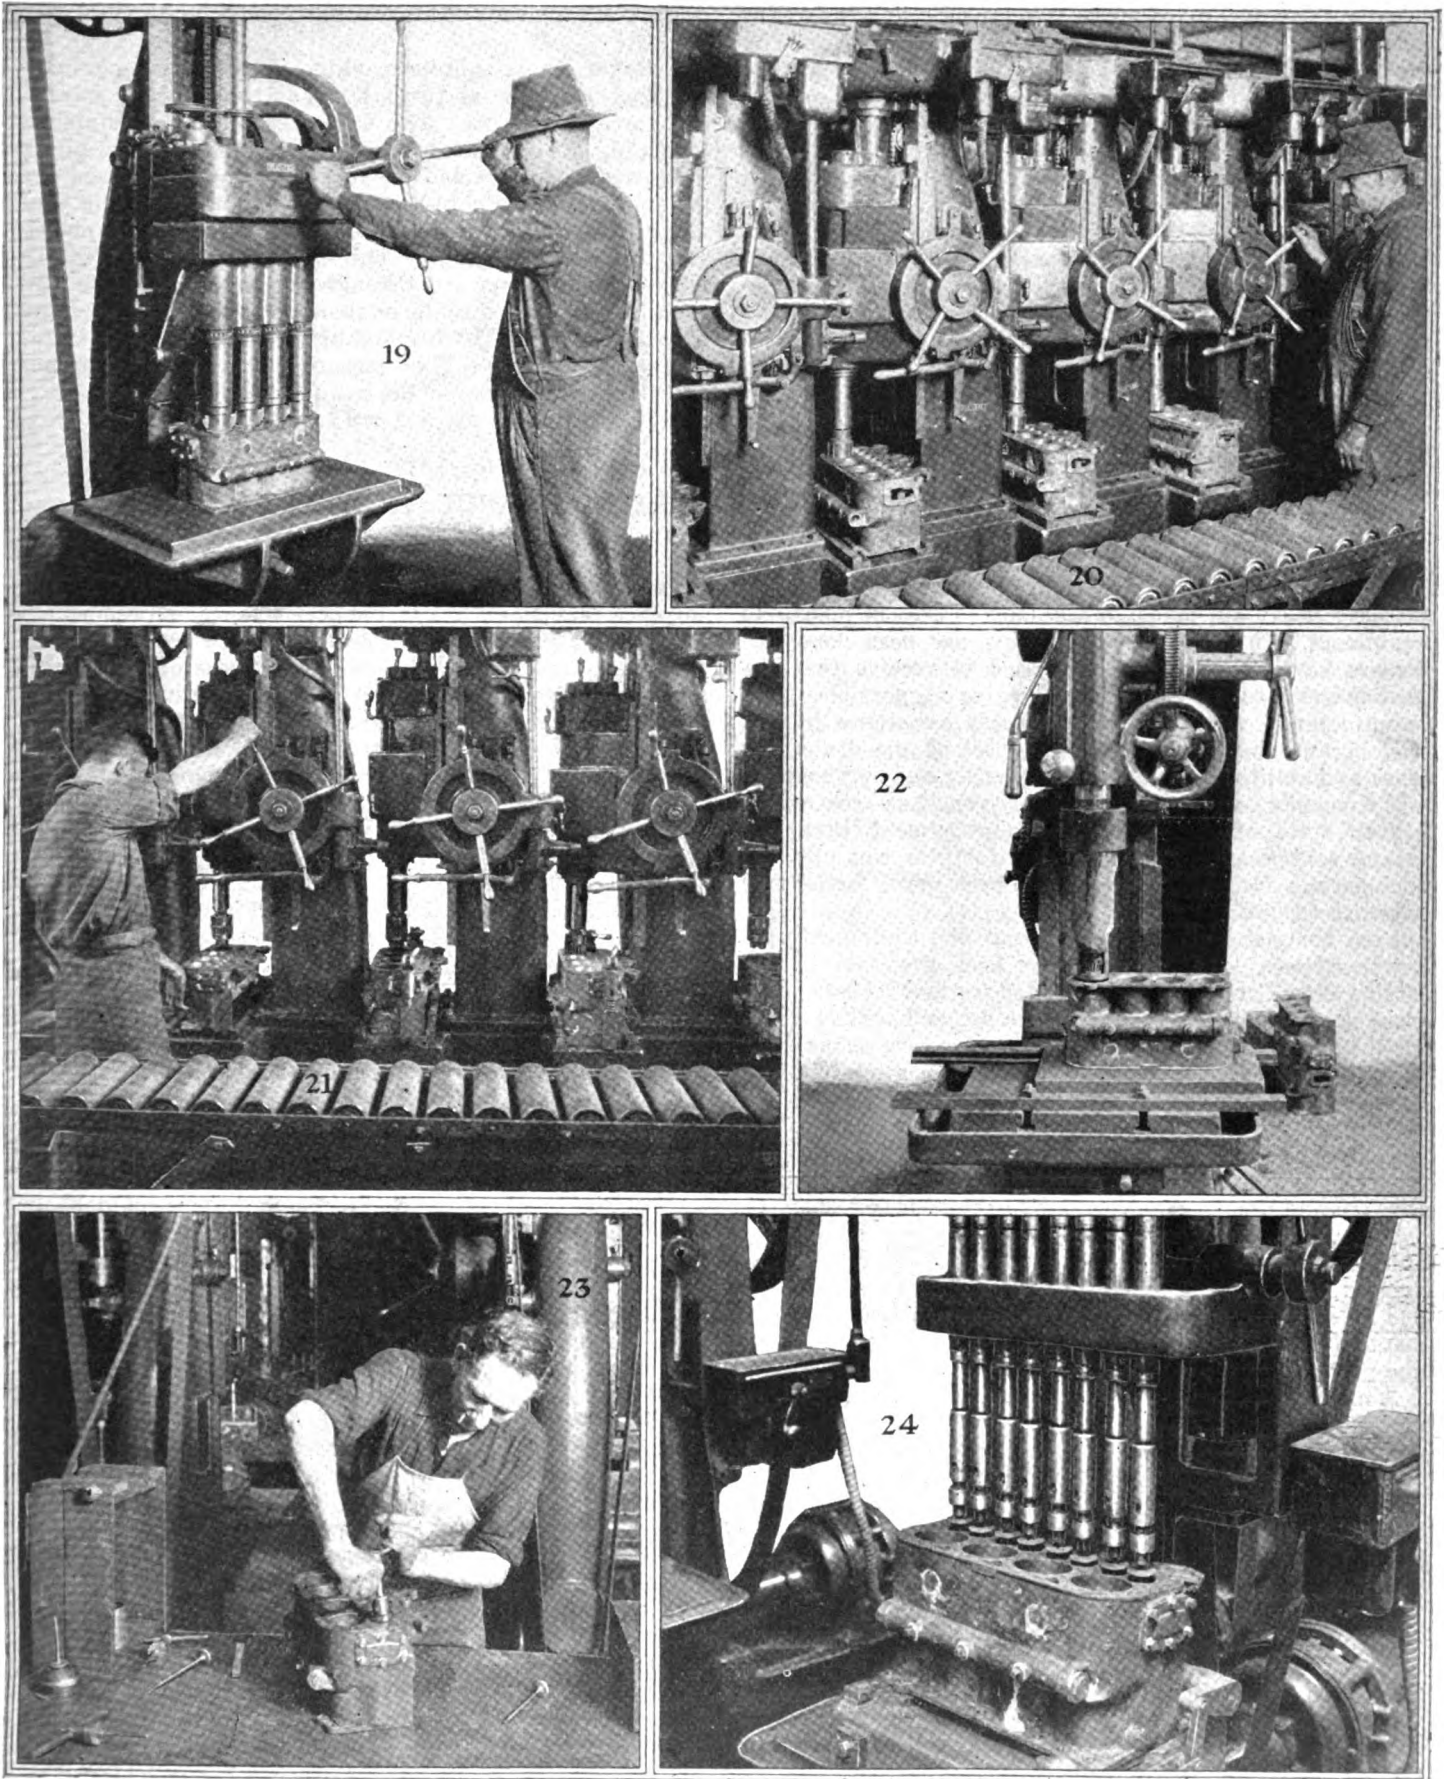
Chamfering the top and bottom of cylinder barrel on a Foots-Burt machine. Fig. 20—Finish reaming the cylinder bores. One bore is reamed at a time on these machines, one operator taking care of eight spindles. Fig. 21—Rolling the cylinder bores to a finished surface. It requires 15 min. to a block to do this work. There is a taper of about 3 deg. on the rolls which is sufficient to run them through the blocks. This rolling operation puts a mirror finish on the cylinder block, slightly compressing the outer skin of the metal. Fig. 22—Baker single-spindle machine for chamfering the connecting rod clearance at the bottom of the cylinder barrel. Fig. 23—Finishing the valve seat by hand. Fig. 24—Grinding-in the valves on a special Foots-Burt valve grinding machine
